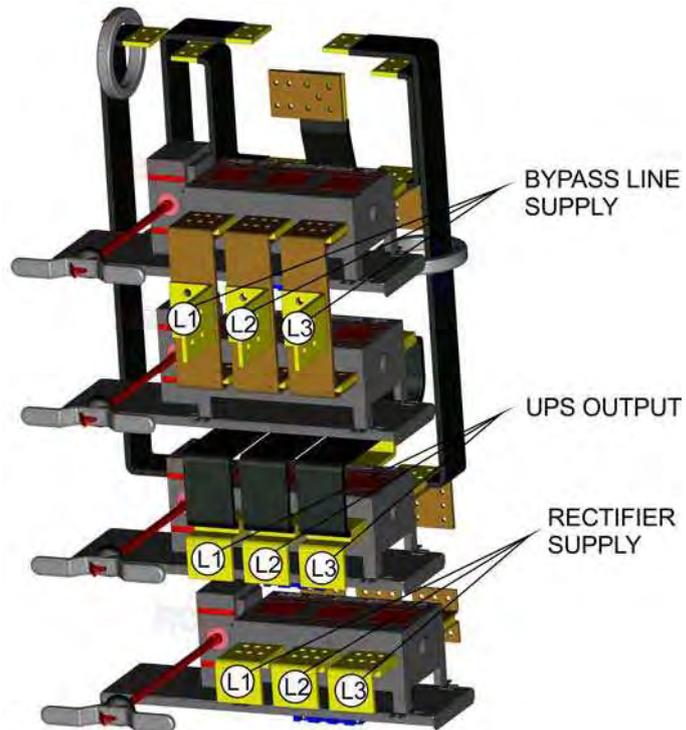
600-800kVA UPSaver, I/O module neutral connection bar (top cables entry)
